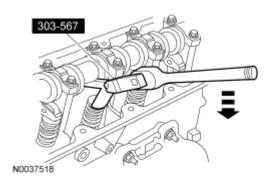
Compressing Valve Spring Courtesy of FORD MOTOR CO.
